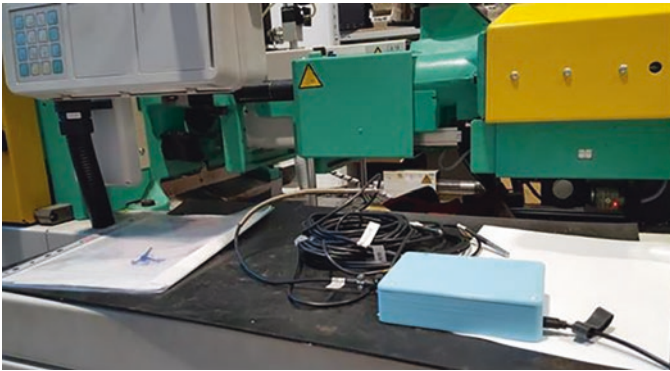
Side view of the prototype test measuring device on the working table of injection molding machine.
